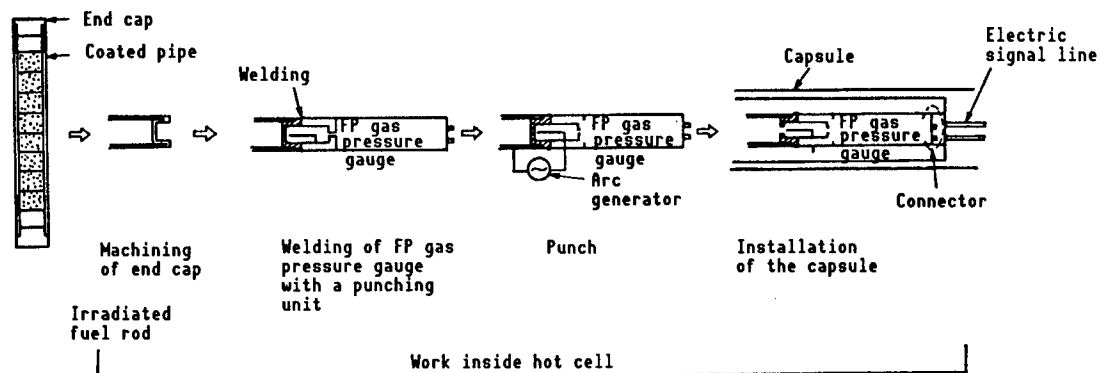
Installation of FP Gas Pressure Gauge in Irradited Fuel Rod
